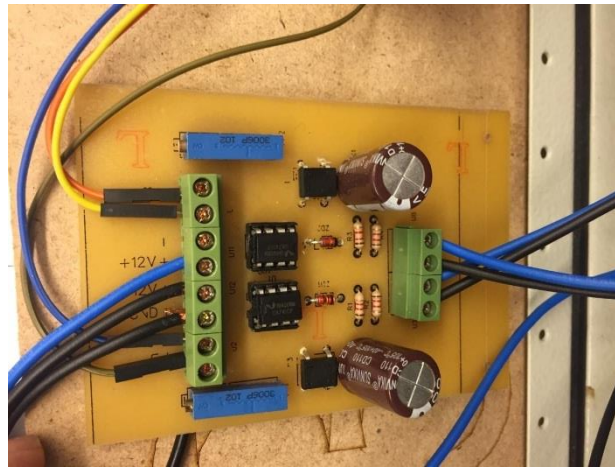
The components of the voltage modification circuit mounted on a PCB.
